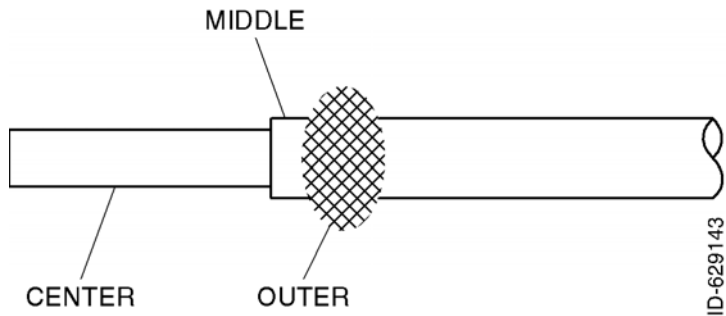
(Sheet 1 of 1) Quad coaxial Cable Preparation
